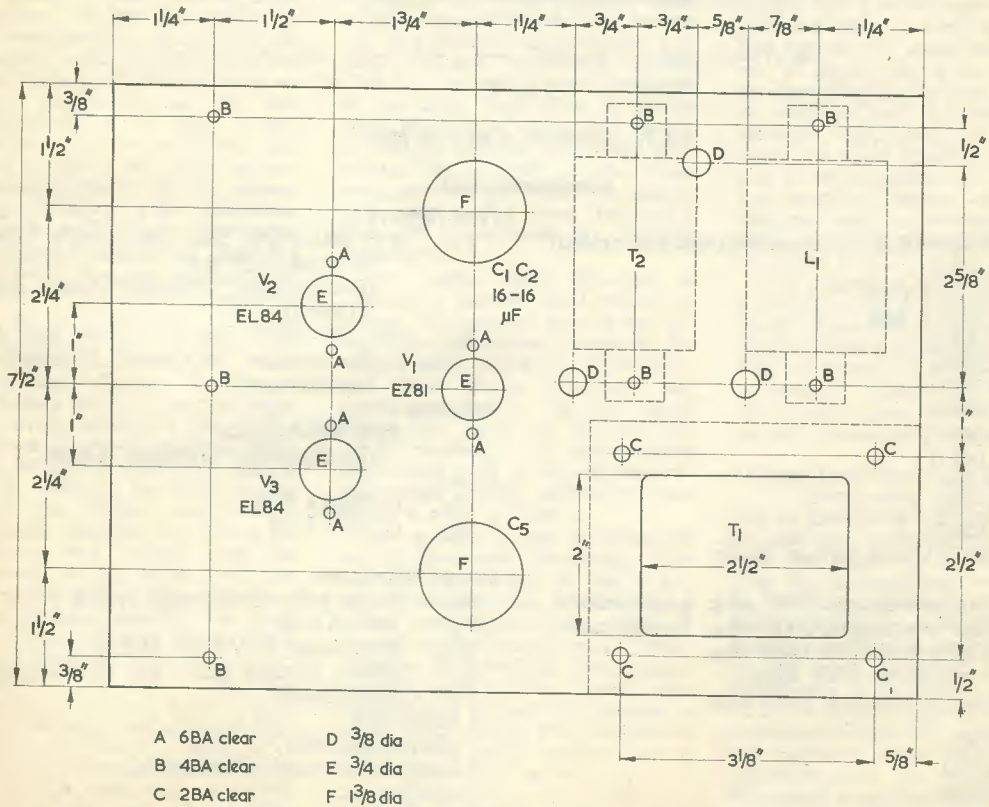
Top view of the chassis, showing drilling dimensions. Holes D are for grommets. Holes F may require different diameters for some electrolytic capacitors
